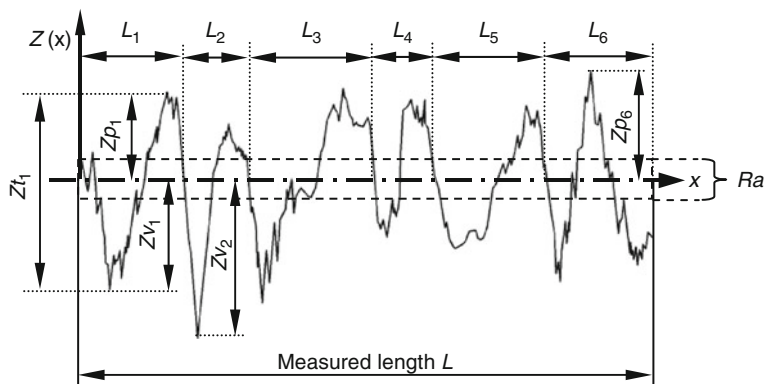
Fundamental terms of surface inspection technology
